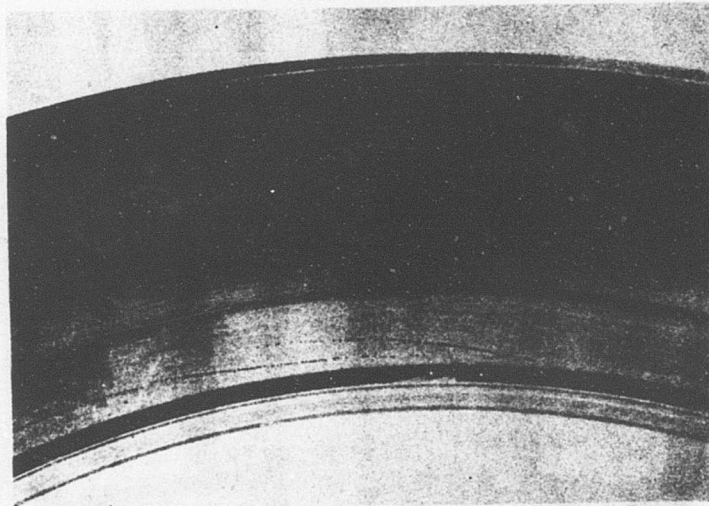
View of Cup Race Surface - Bearing S/N 73-69
